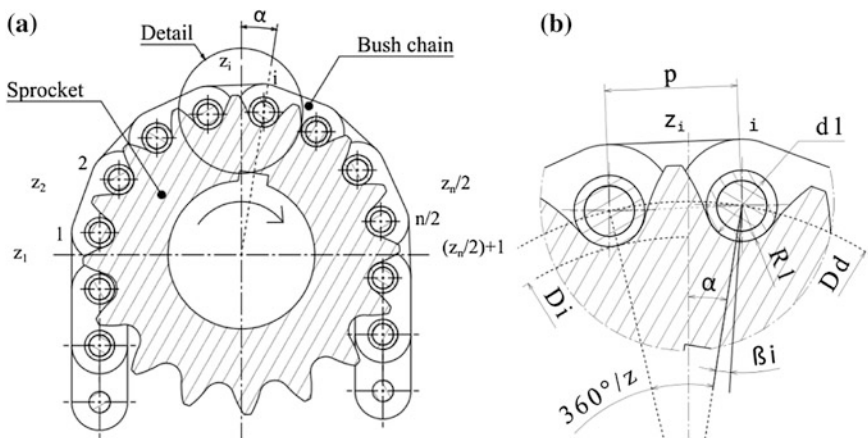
Contact angles between bushing and sprocket. a General view, b detail view
